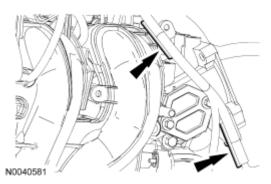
Locating Pin-Type Retainers Courtesy of FORD MOTOR CO.
